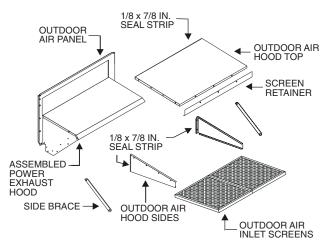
Outdoor Air Hood Assembly with Power Exhaust Assembly
